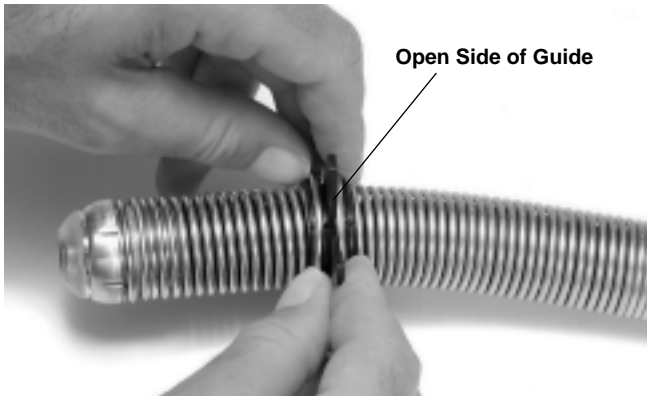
Press the c-rings into the grooves on the centering guide. Make sure the openings in the c-rings are 180 degrees opposite the opening in the pipe guide.
